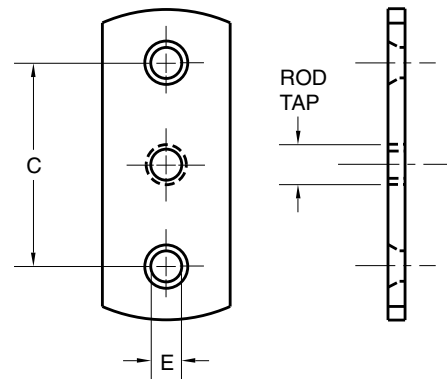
SE AND FIGURE 85SCT – SINGLE PLATE
